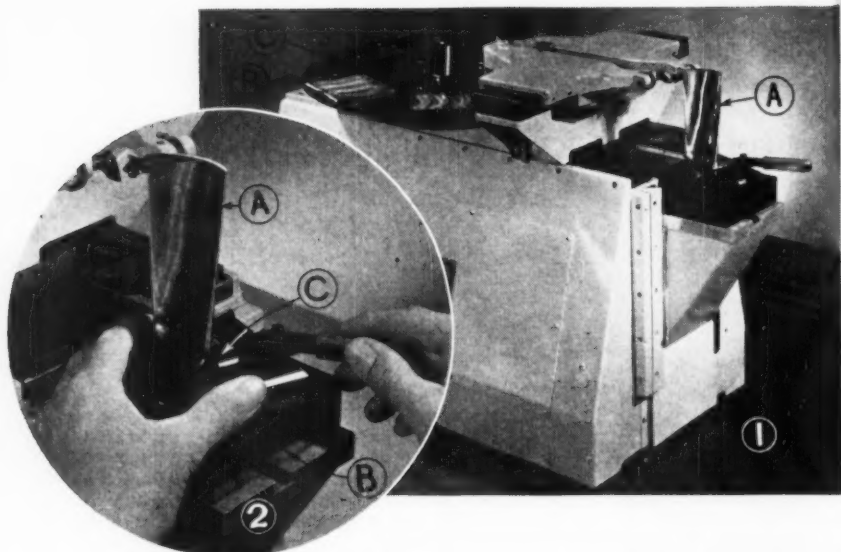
A Pant-O-Scriber Blade Checker used for checking 3 sections of a finished turbine blade. The blade "A" is held in fast acting holding fixture "B". Figure 2. The holding fixture is a duplicate of the mating assembly and the blade is held in the fixture by a set of fast acting cam locking, clamping jaws. The Blade is also positioned in the holding fixture locating on the leading edge "C". The indexing table "B", Figure 1, for holding the Pant-O-Scribing glass "C" automatically rotates a known distance as the blade "A" is automatically indexed for checking sections E-E, C-C, and A-A.
